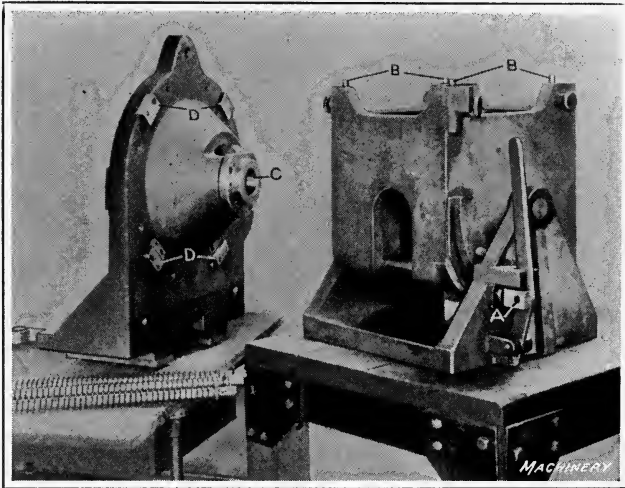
Cradle Jig and Cluster Plate employed in drilling Twelve Holes on a Multiple-spindle Drilling Machine
